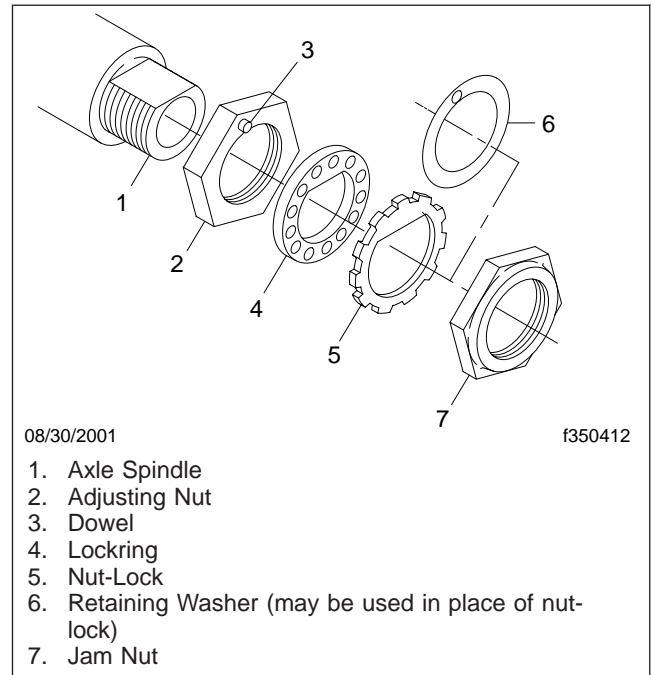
, Axle With Nut-Lock (or washer) and Lockring
